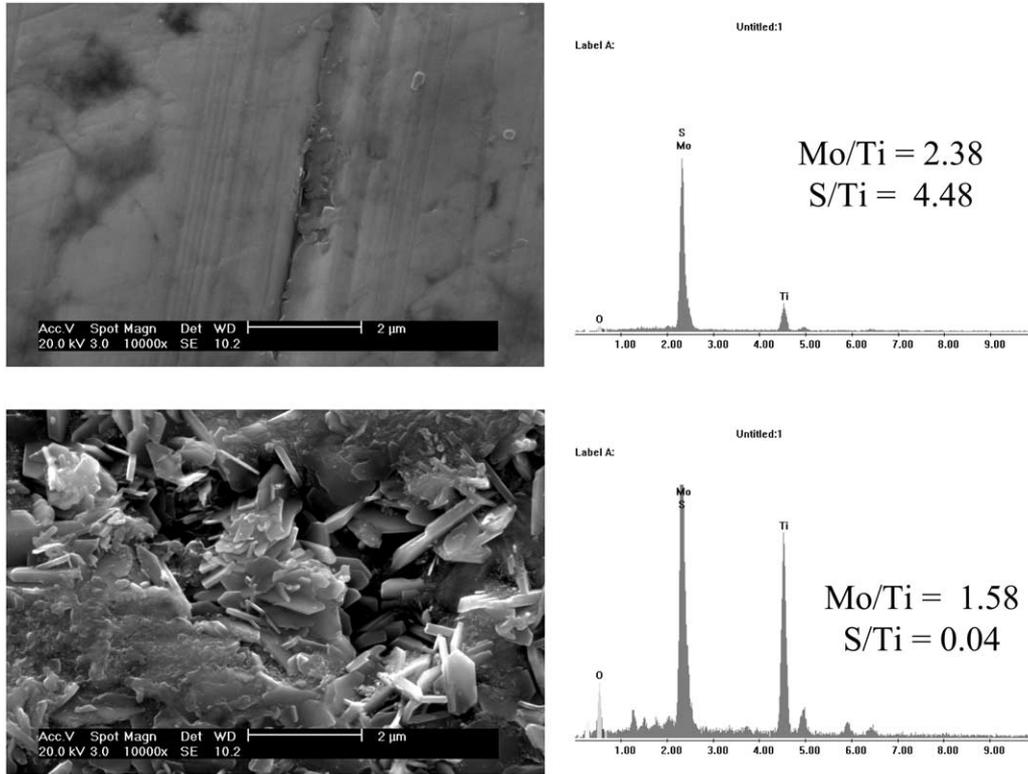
Surface morphology and its composition of rake surface of MoST coated turning insert (standard condition, after 1 min turning test, type 1). (a) Far from the contact zone with workpiece material and (b) underneath the contact zone with workpiece material.
